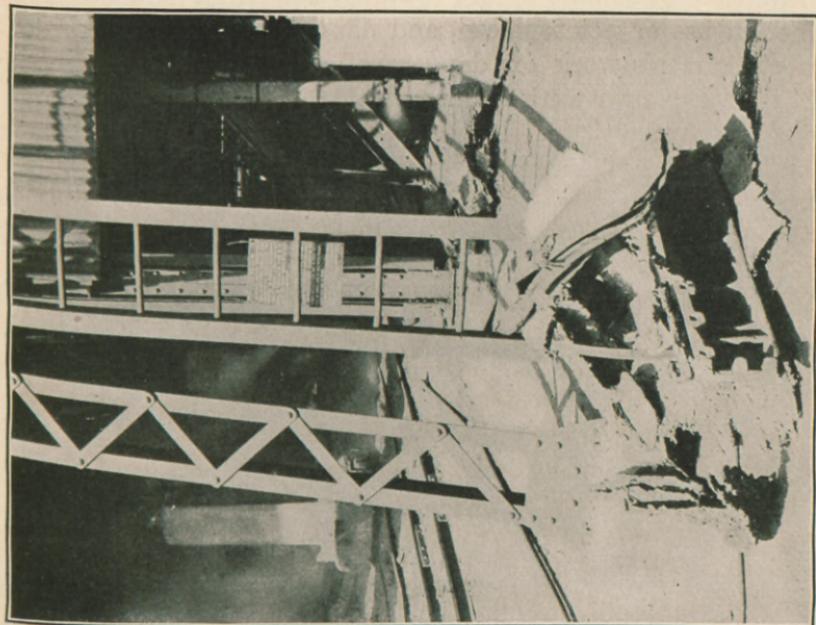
Scrap piled at the foot of a ladder, a dangerous place to leave it. Keep floor clean.
